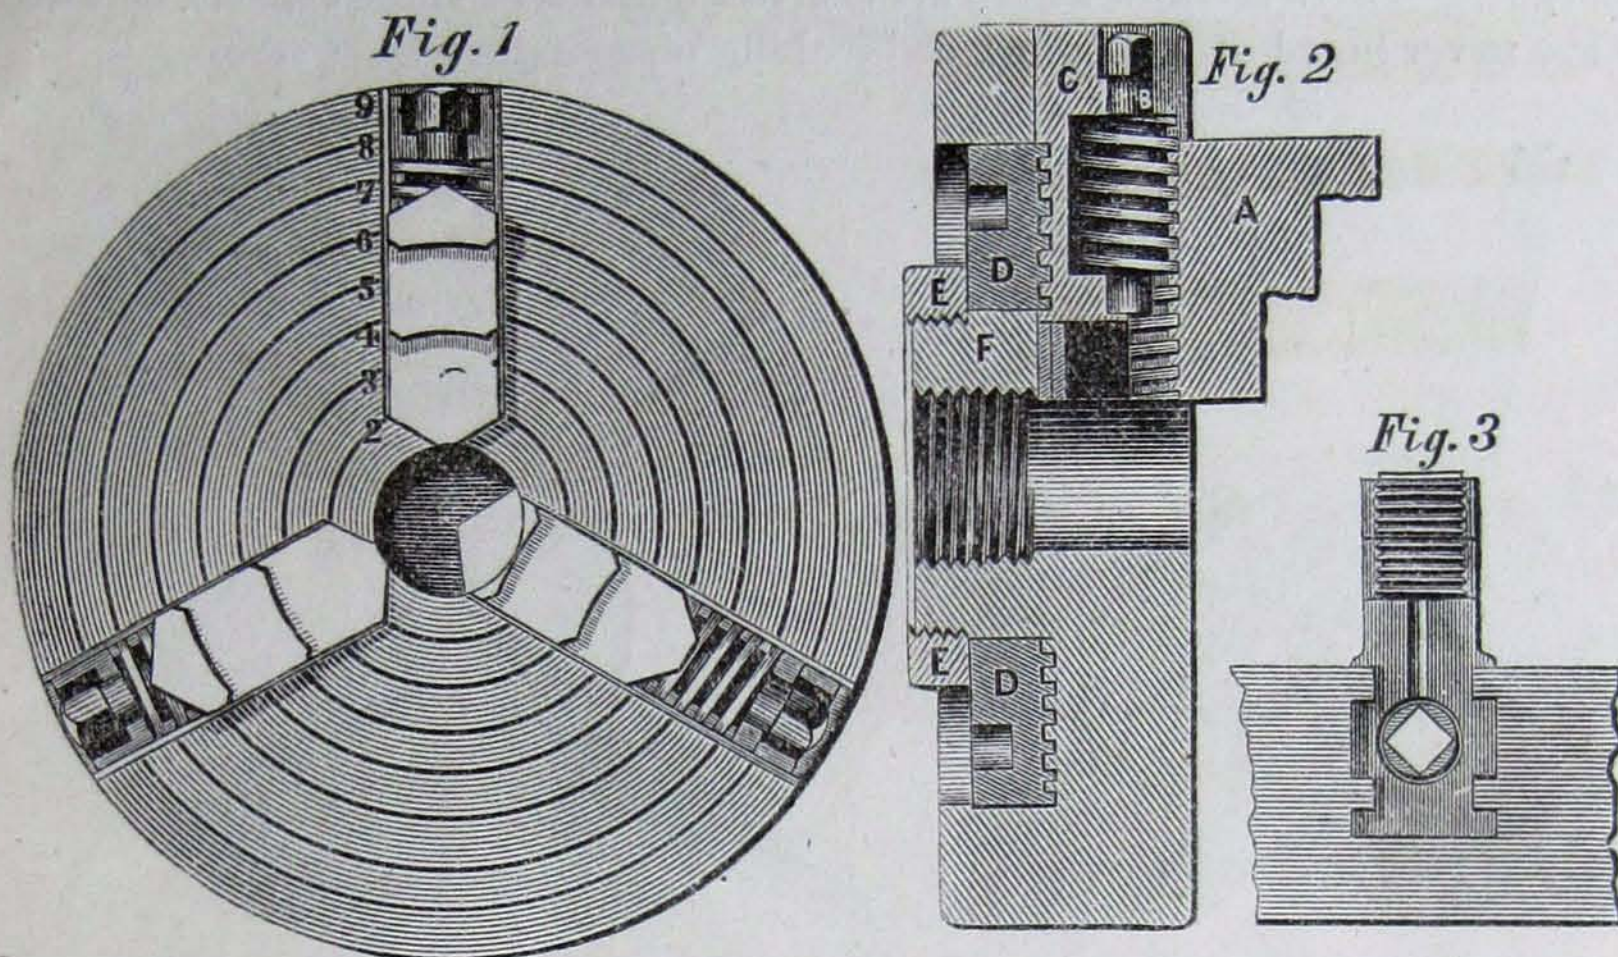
is a front view of the Chuck with one of the jaws reversed.
